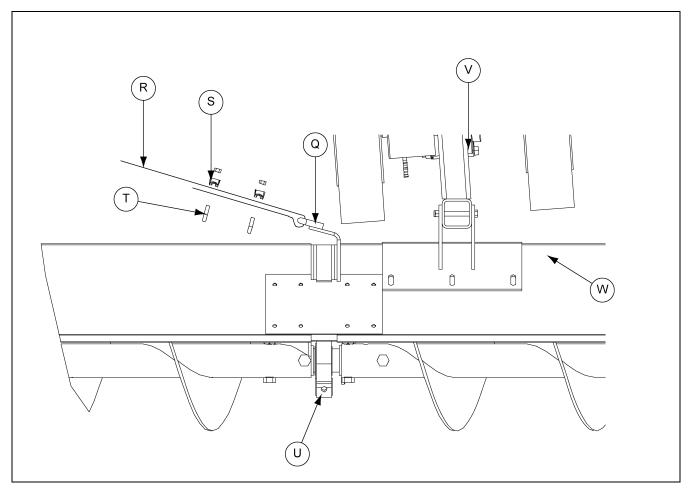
Truss Cable Anchor Detail (As viewed from the top.)
